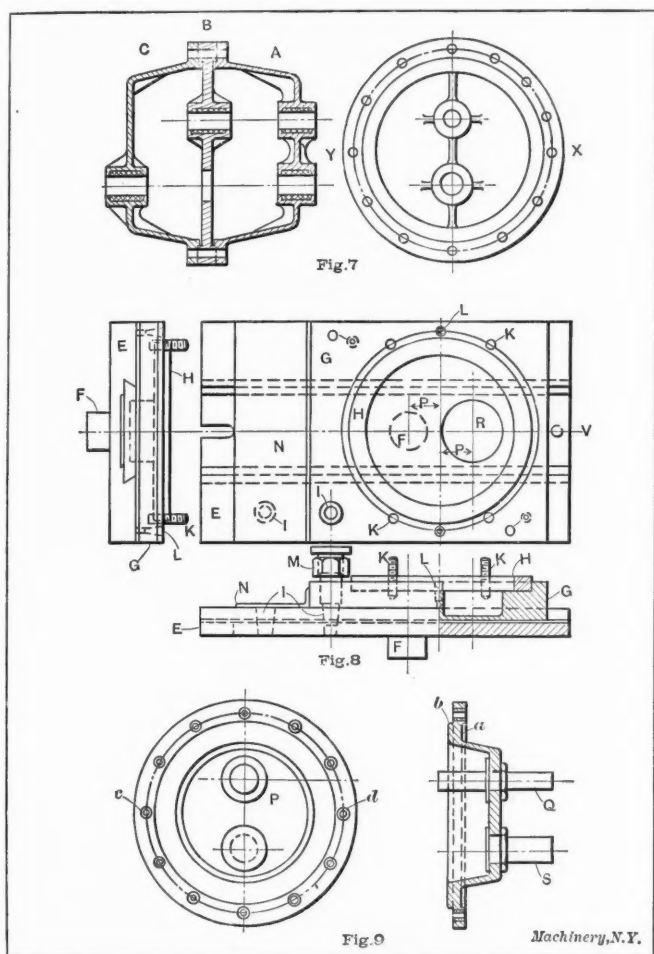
Casing with Drilled Flanges and Bored Bearings. Fig. 8. Jig in which Bearings are bored. Fig. 9. Jig in which Flanges are drilled
